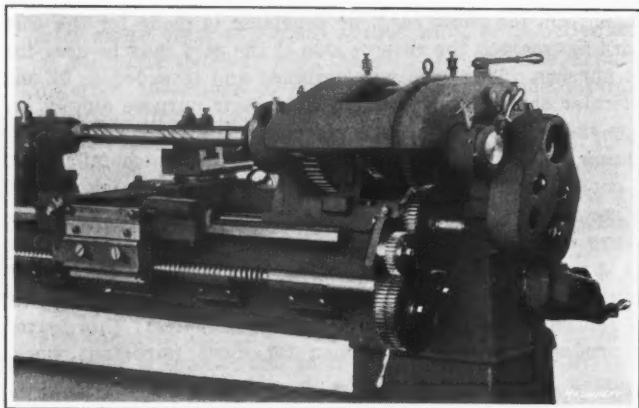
Attachment for cutting Threads of Coarse Pitch or Large Lead
